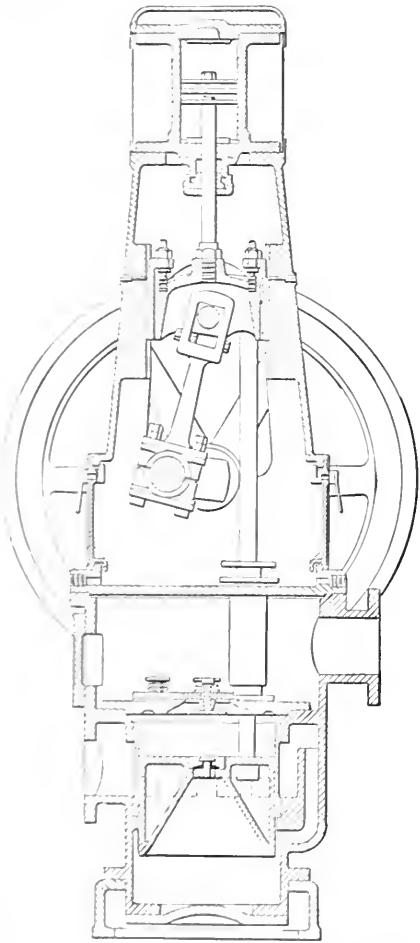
MULLAN'S VERTICAL AIR PUMP
